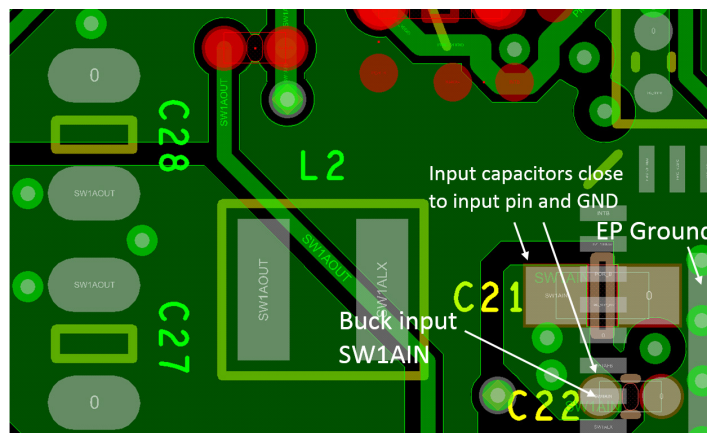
SW1A layout - top + bottom layer components and silkscreen
